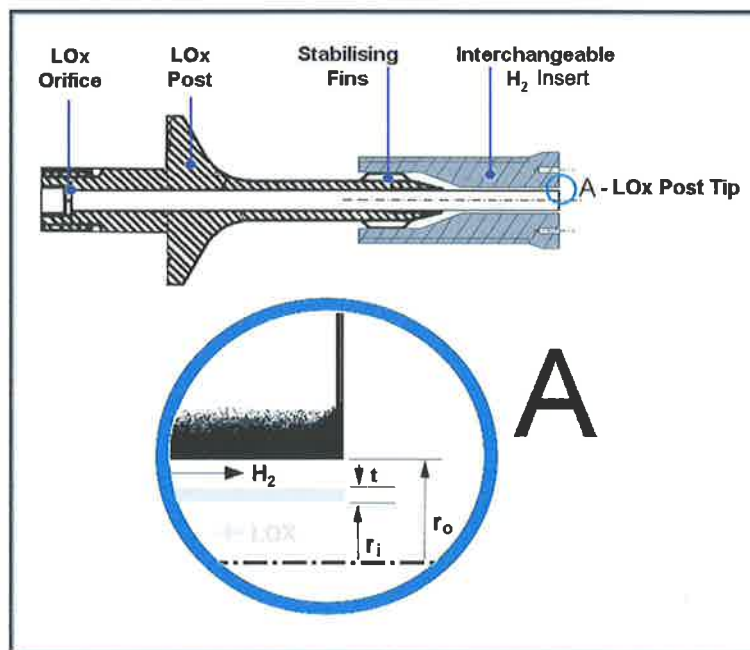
Single shear coaxial injector used in combustion chamber C
